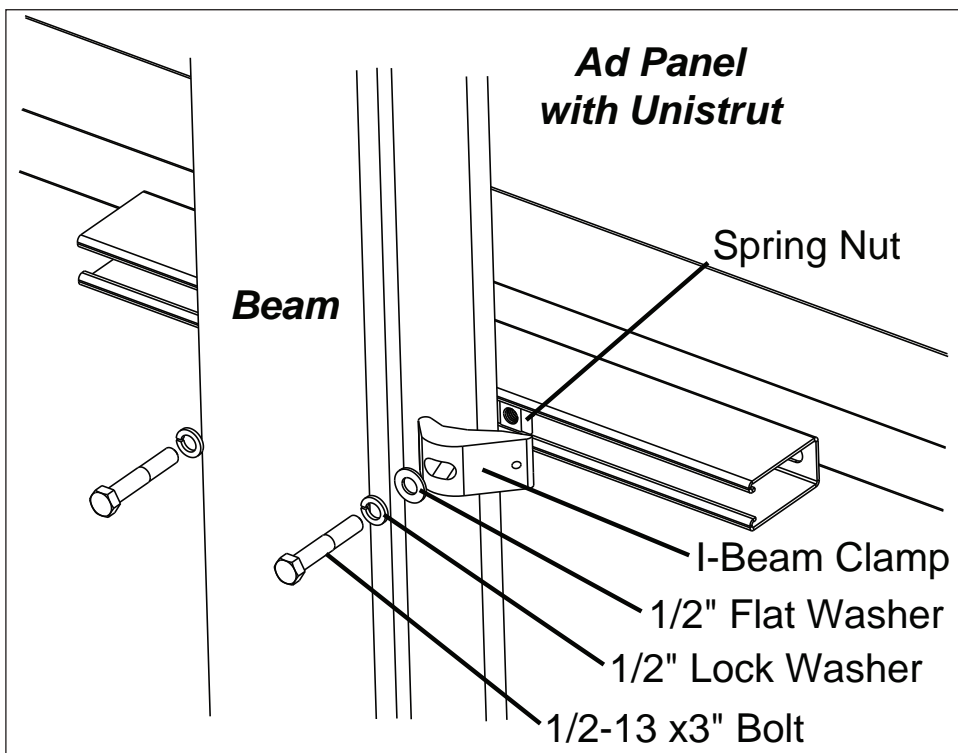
Ad Panel I-beam Clamp Mounting (LVX), Rear Rotated View
